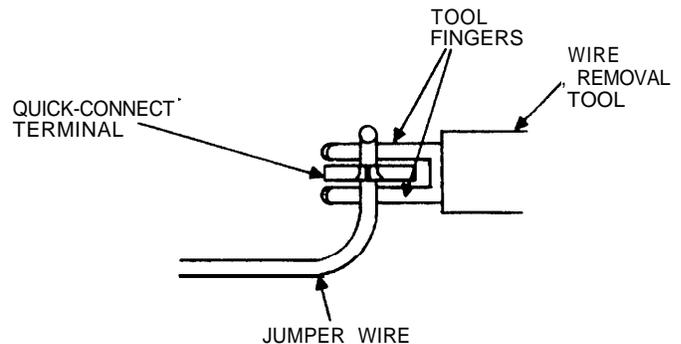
Inserting the Wire Removal Tool Around Terminal.
